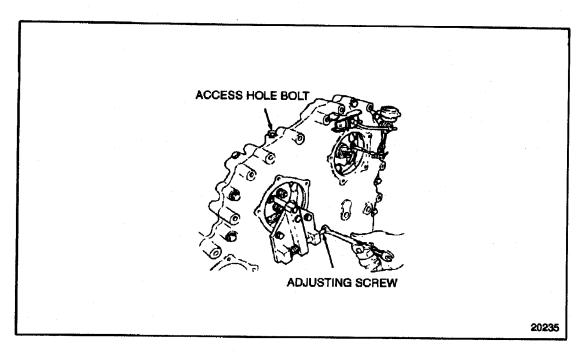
Adjustable Idler Gear-to-Camshaft Drive Gear Lash Adjustment
